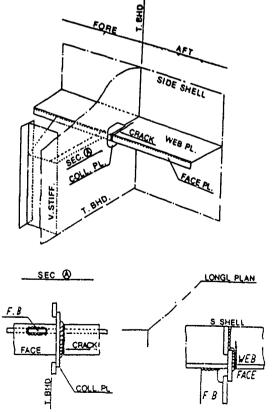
Side Shell Longitudinals Cracks at Transverse Bulkheads
